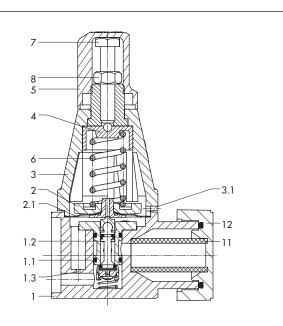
Sectional view of Type 4708 Supply Pressure Regulator
